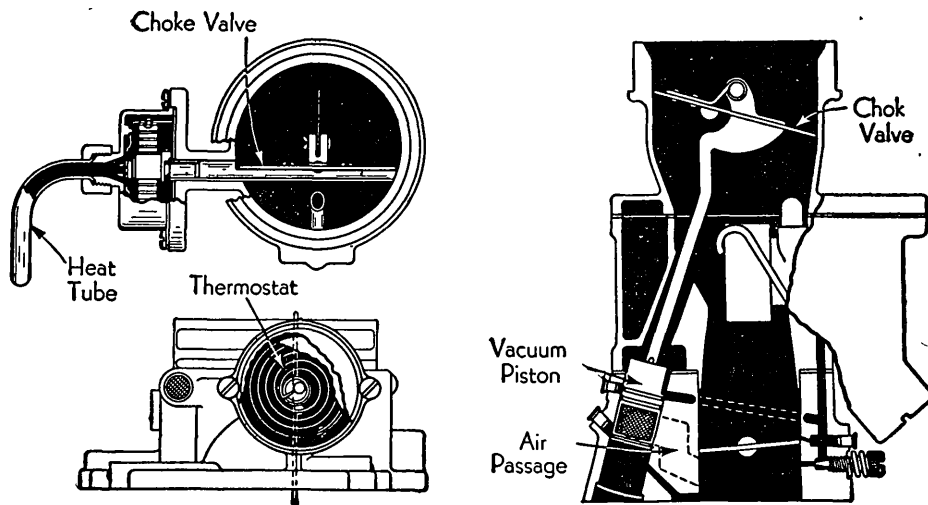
STROMBERG. Used with AAO-161 carburetor
